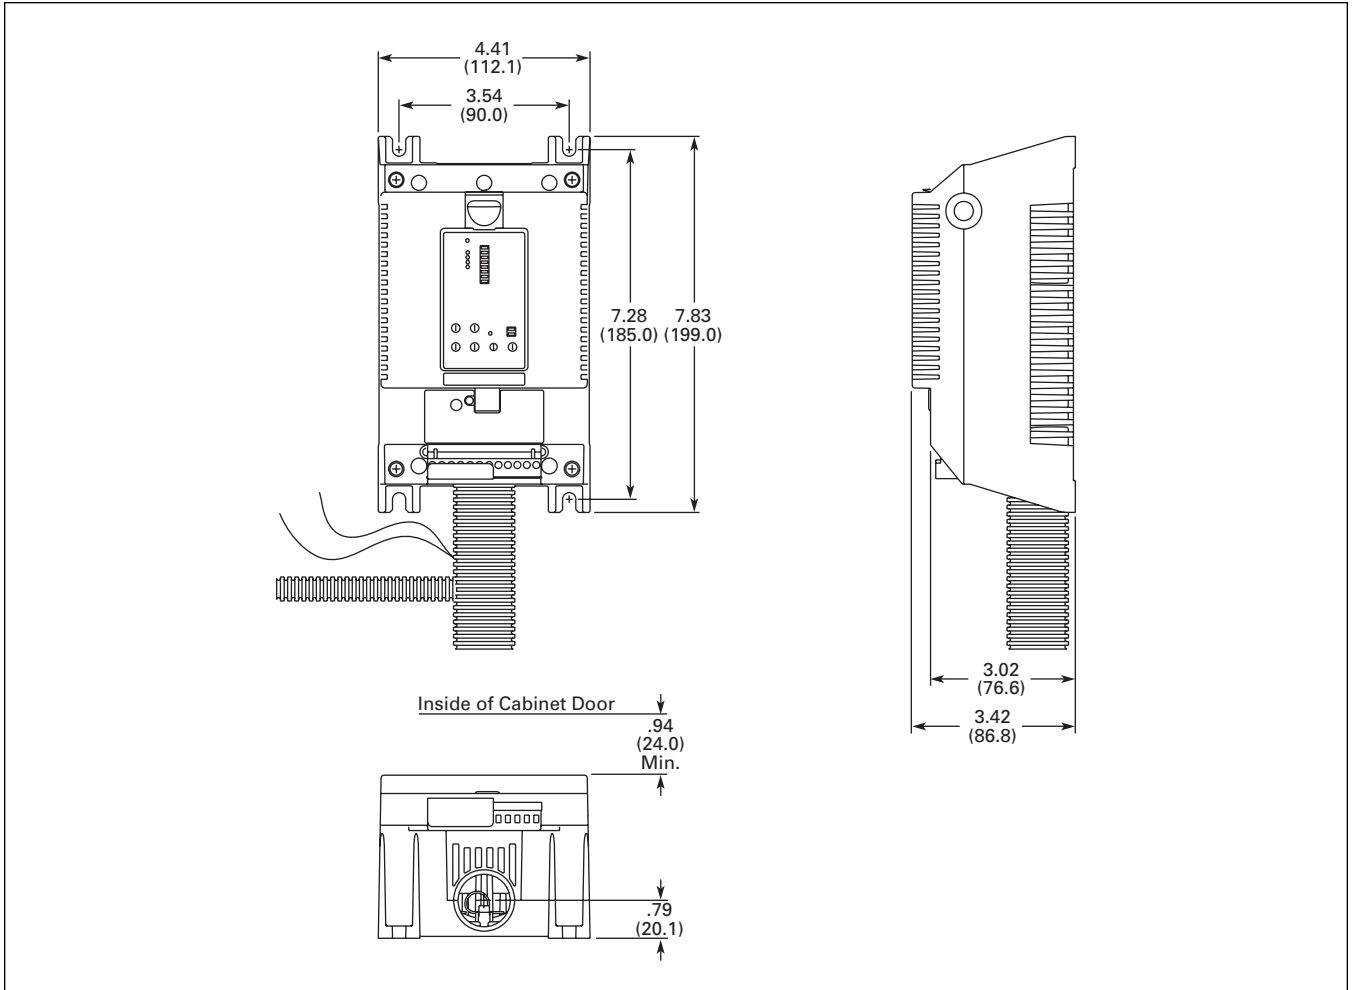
Control Module — Approximate Dimensions in Inches (mm)
